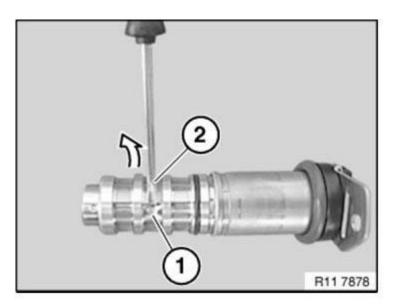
Bending Open Welding Spots On Filter Element Using Screwdriver Courtesy of BMW OF NORTH AMERICA, INC.
